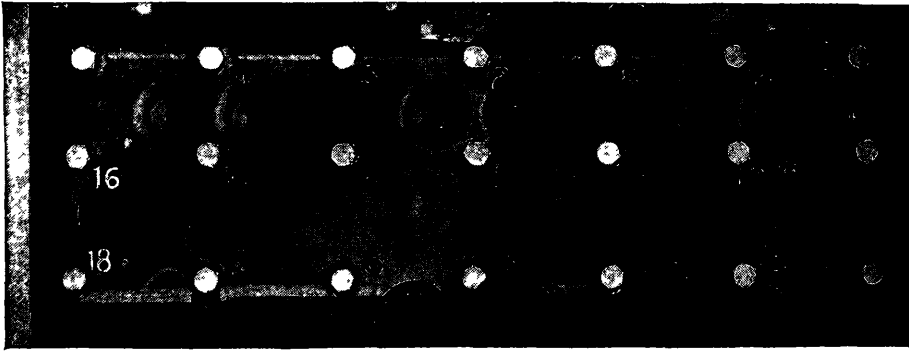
Cylinder head tightening sequence. 1935-52 sixes
